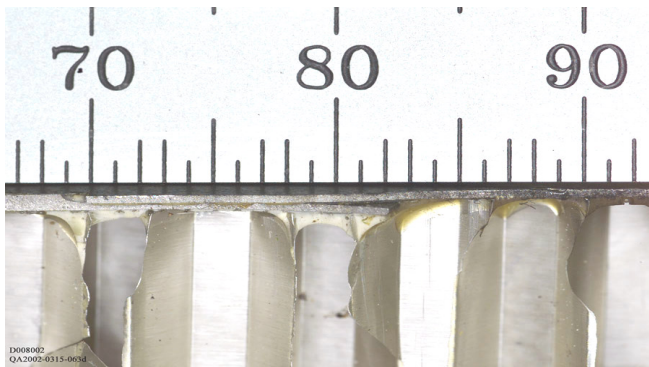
View of the fatigue initiation point and the crack that led to failure of the rotor blade.
